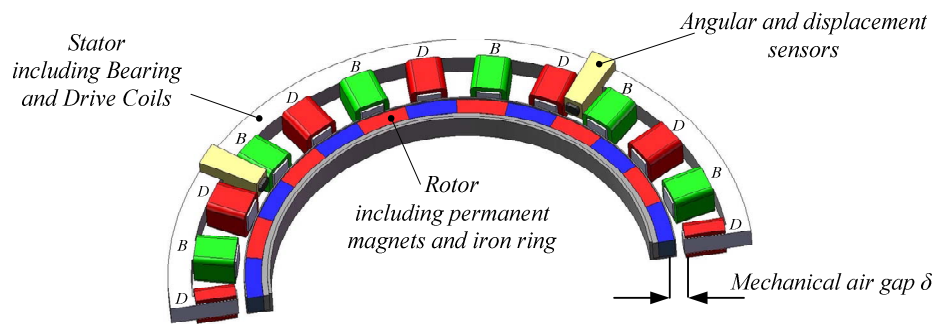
Schematic cut view of the stator with alternating coils for the drive (D) and bearing (B) system and the rotor with alternately polarized permanent magnets.
